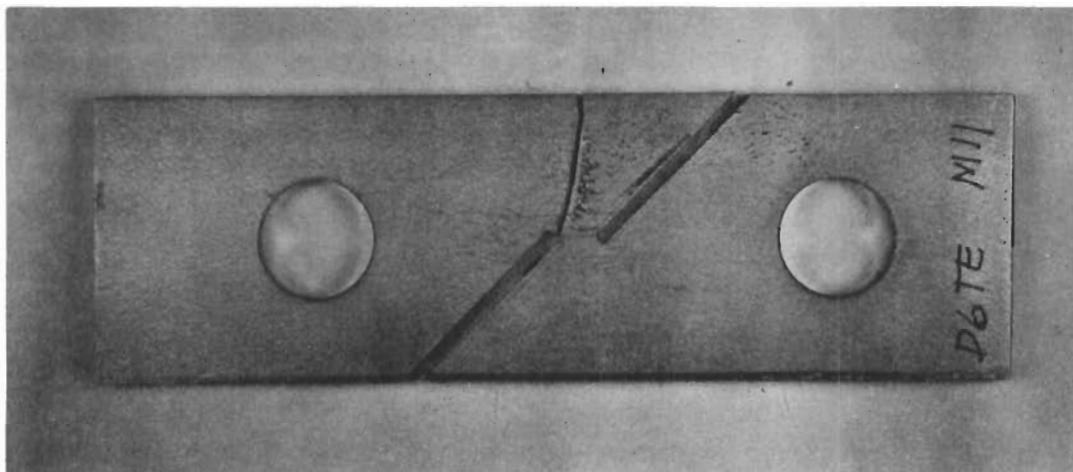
TYPICAL TENSION-TEARING FAILURES OF 0.125 INCH THICK T1-4A1-3MO-1V SINGLE SHEAR SPECIMENS
